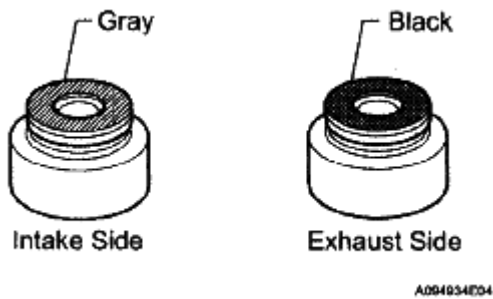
Identifying Intake And Exhaust Valve Oil Seals
